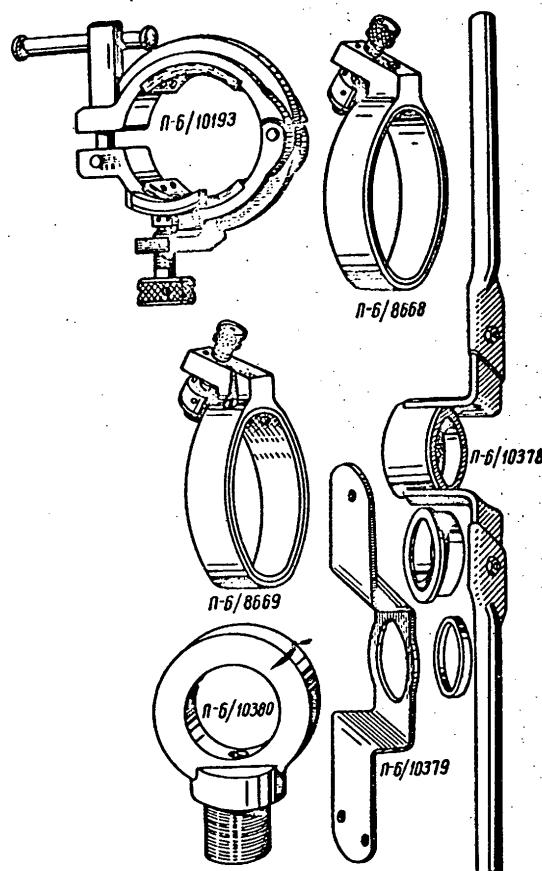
GENERAL PURPOSE APPLIANCES AND FIXTURES
